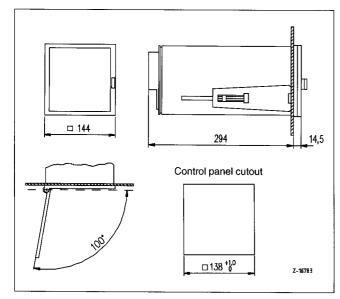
Dimensional drawing of Minicomp MK (dimensions in mm)
